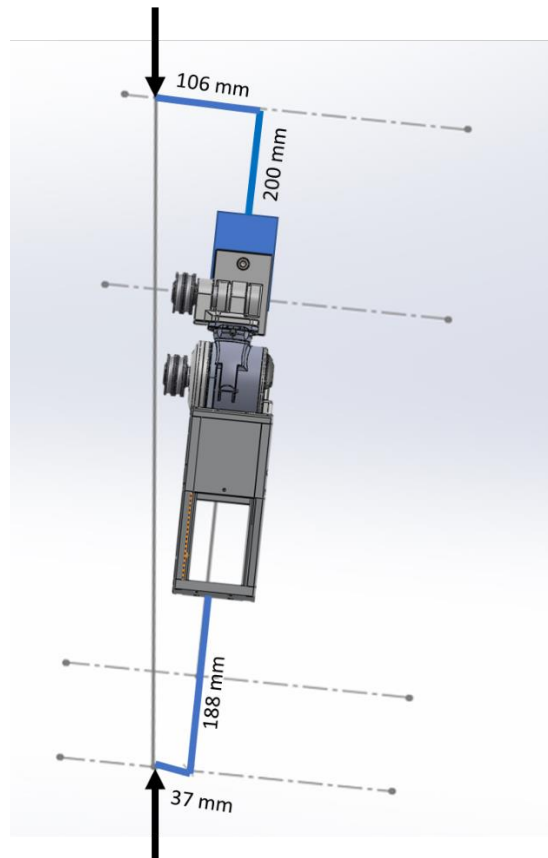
Medial-lateral mechanical testing setup and dimensions
